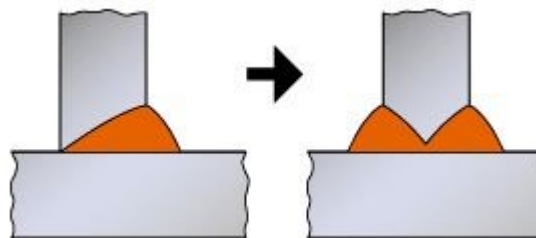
Double-sided welds are less susceptible than large single-sided welds. (The welding institute 2010.)
